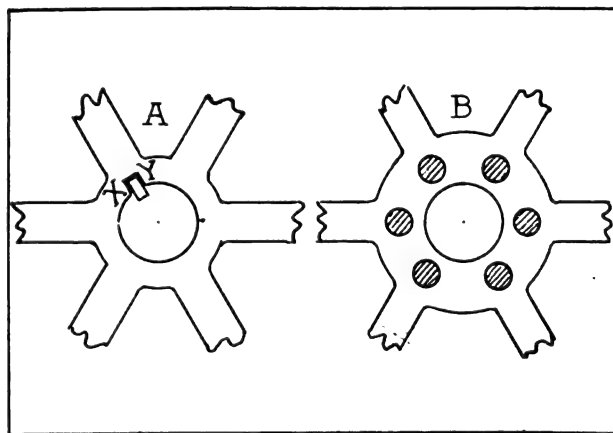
A, Points of Wear with a Keyed Type Flywheel; B, Point of Loosening of a Bolted-on Type Flywheel.
